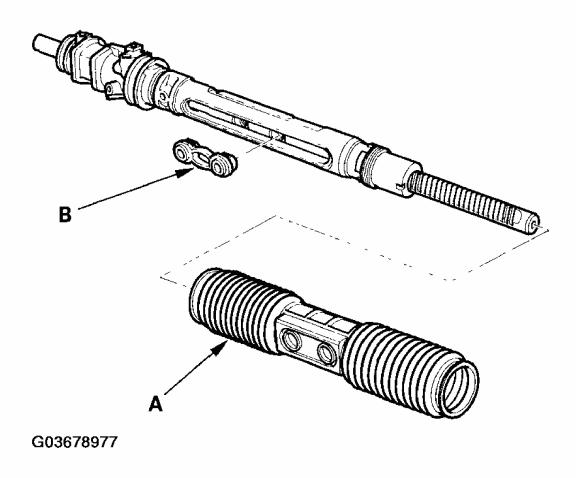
Removing Boot And Slider Guide From Cylinder Courtesy of AMERICAN HONDA MOTOR CO., INC.
